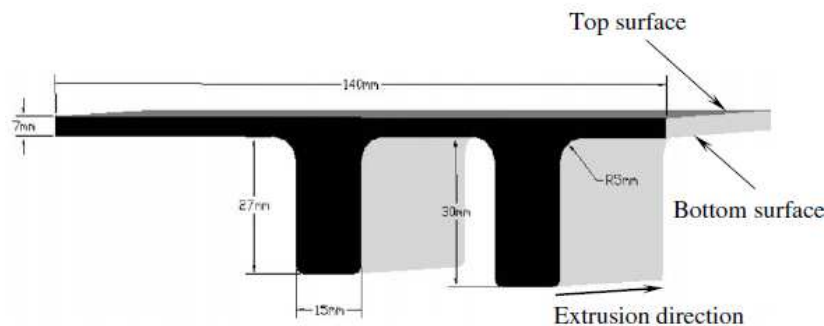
AZ31 extruded test material selected in the paper [29]
